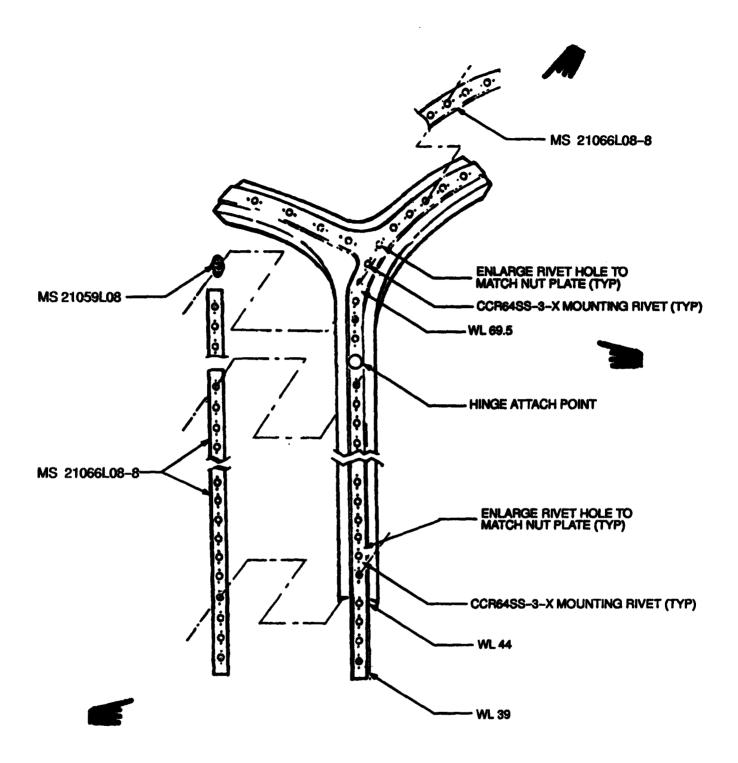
Door Frame/Windshield Frame Assembly Repair (Sheet 3).
